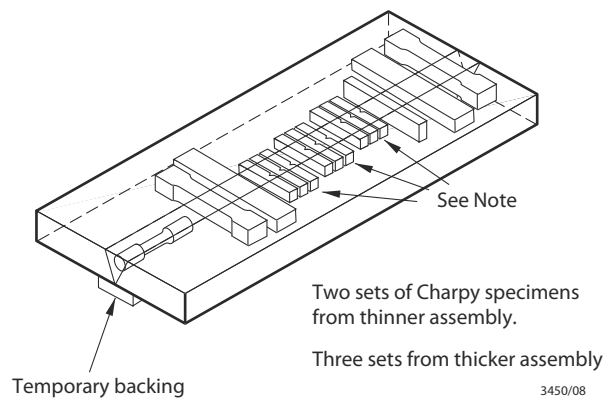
Butt weld test assembly and specimens for all techniques
